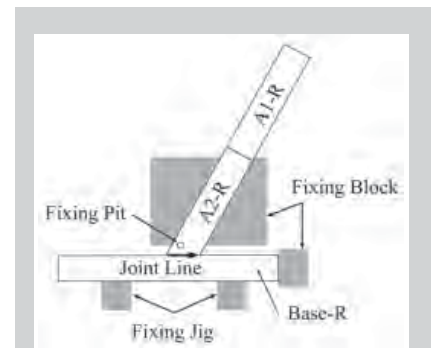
Method using FSW technique for welding the base and column.^{2,3}
